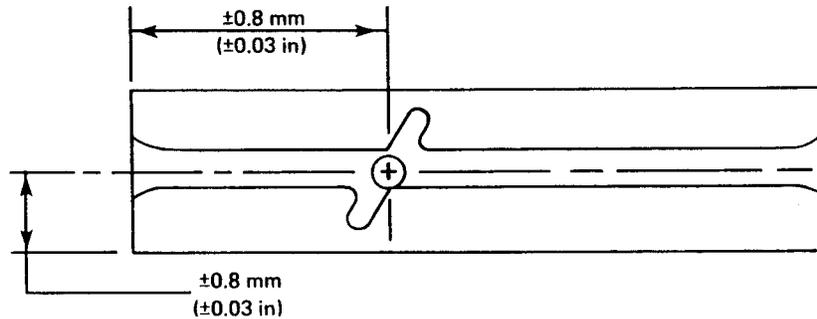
GROOVE AND HOLE LOCATION TOLERANCE
